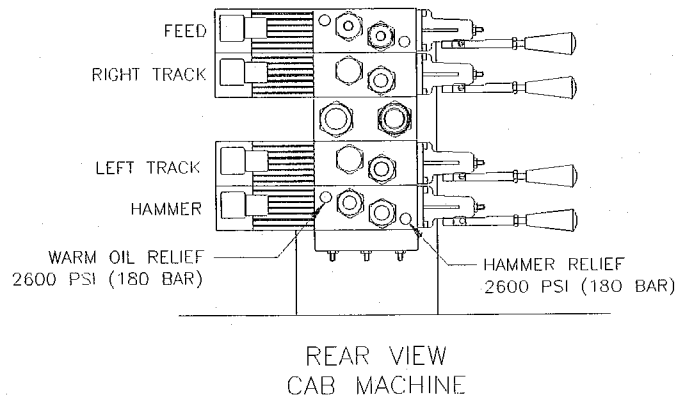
Auxiliary Valve Bank on Cab Machine (ref. 414445)
